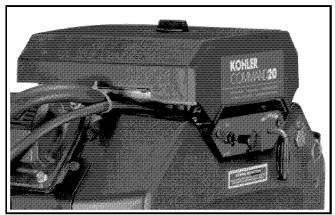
Optional Engine Mounted Throttle and Choke Controls.
